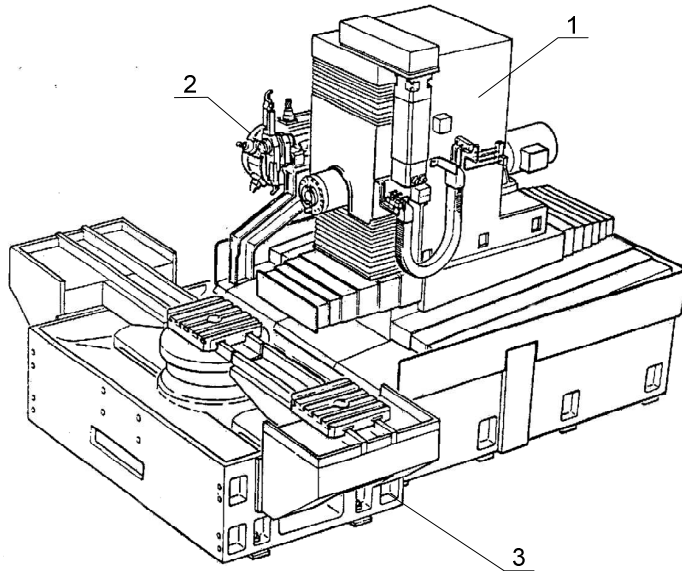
Basic module of horizontal machining center used in flexible manufacturing systems:
